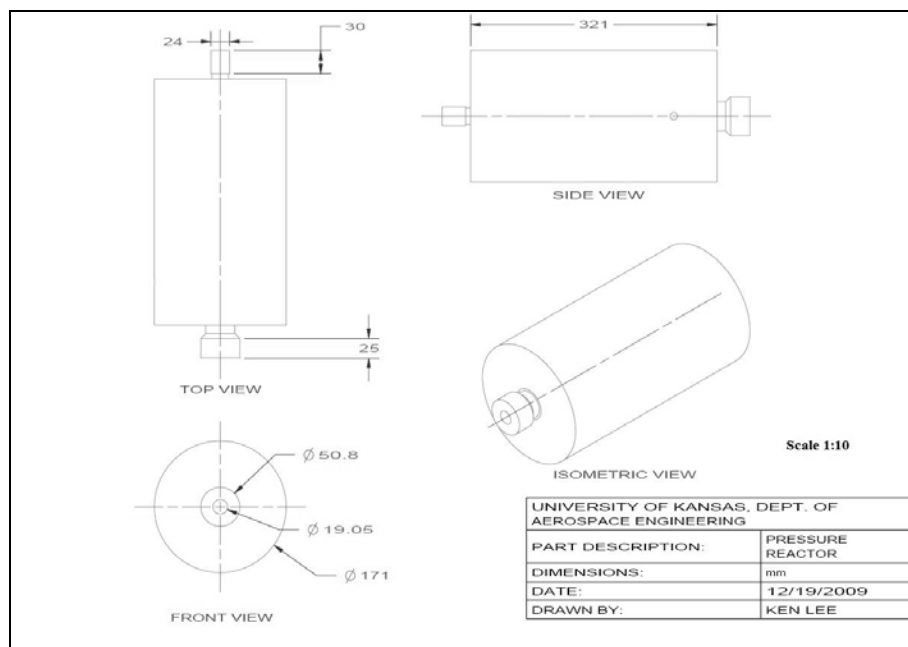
Side, Top and Isometric CAD Views of the Pressure Reactor Drafted in UG NX 6.0.
